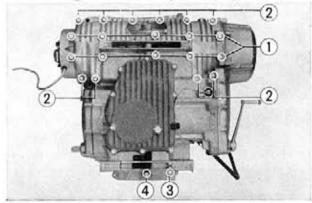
1 8mm bolts (2) 6 mm bolts
